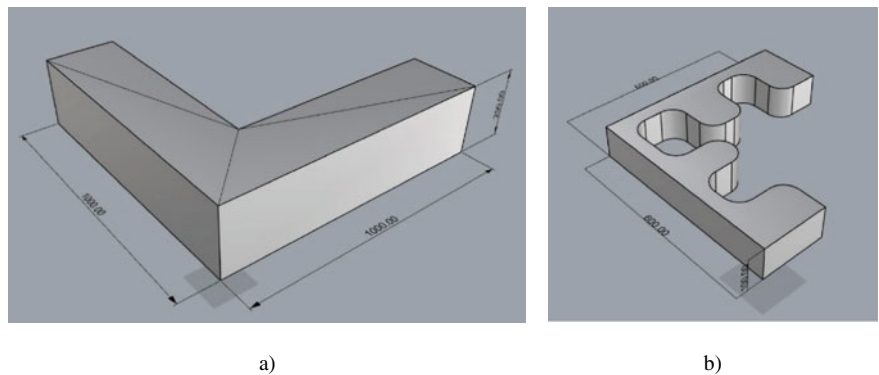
CAD design for 3D printing: a “L” shape and b hexagonal shape
